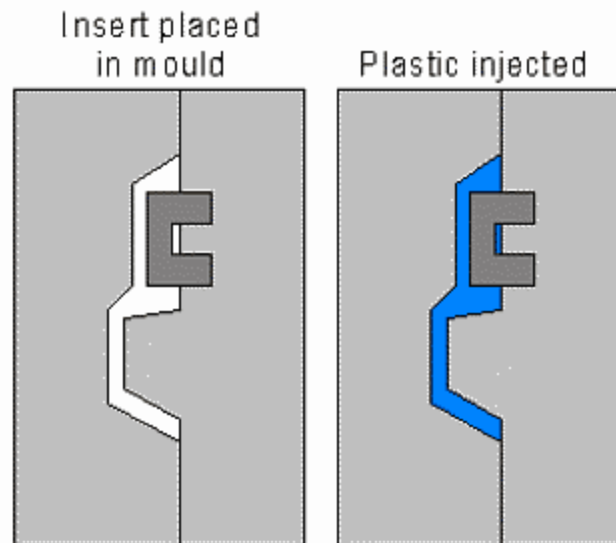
Insert molding to mold polymer around a metallic insert (Designinsite, 2007)
